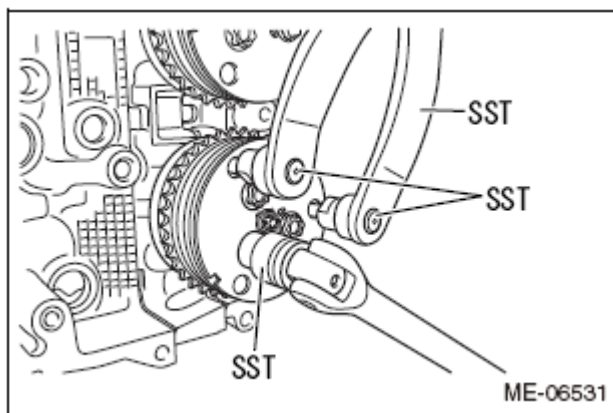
Removing LH Camshaft Timing Exhaust Gear Assembly
